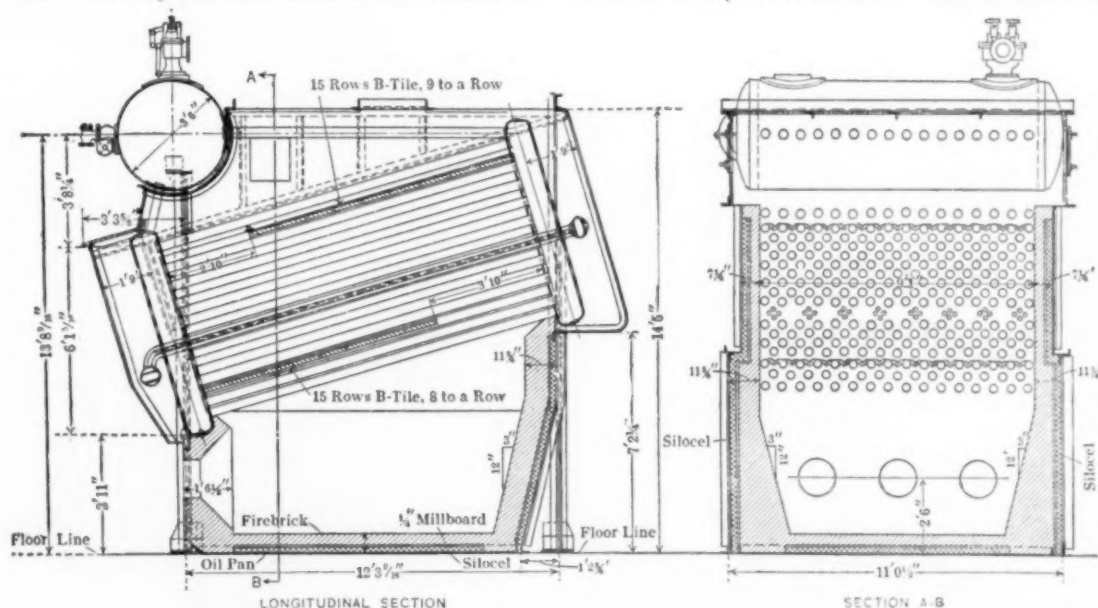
SETTING FOR HEINE BOILER BUILT FOR THE EMERGENCY FLEET CORPORATION
